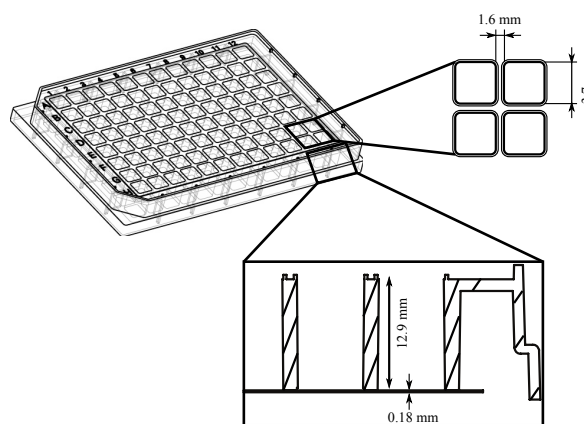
Layout of the ibidi μ -Plate 96 Well. Each plate contains 96 wells with the dimension shown in the figure. Adapted from [117].
